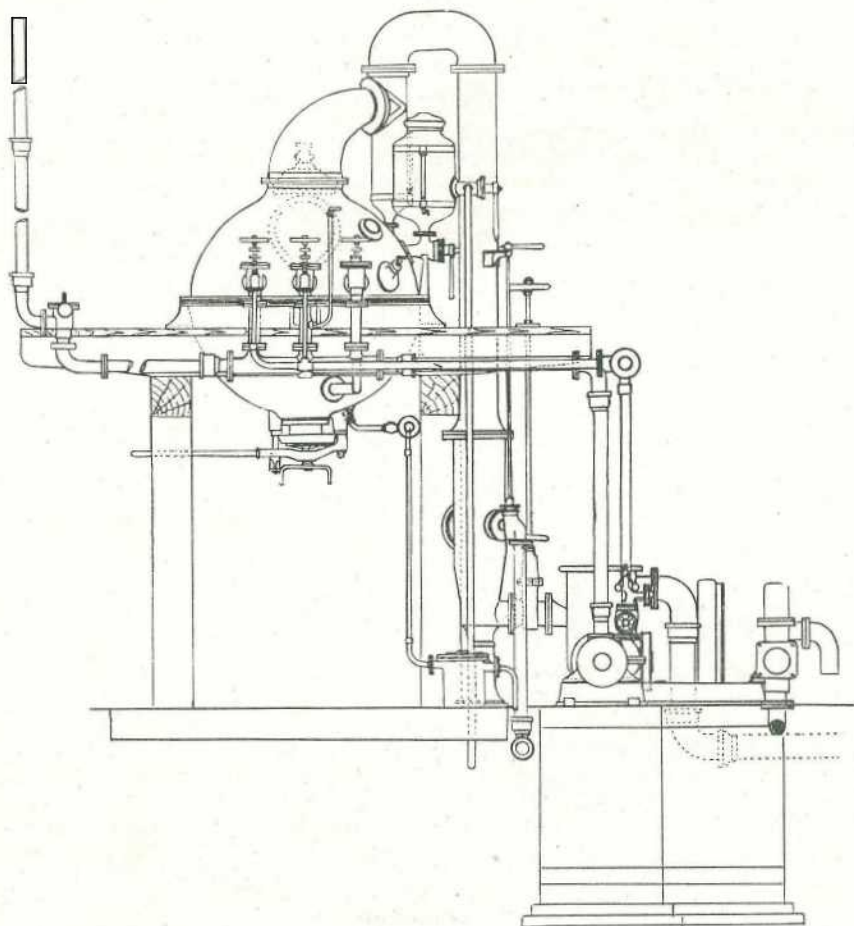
EARLY TYPE OF VACUUM PAN USED IN QUEENSLAND SUGAR MILLS.
